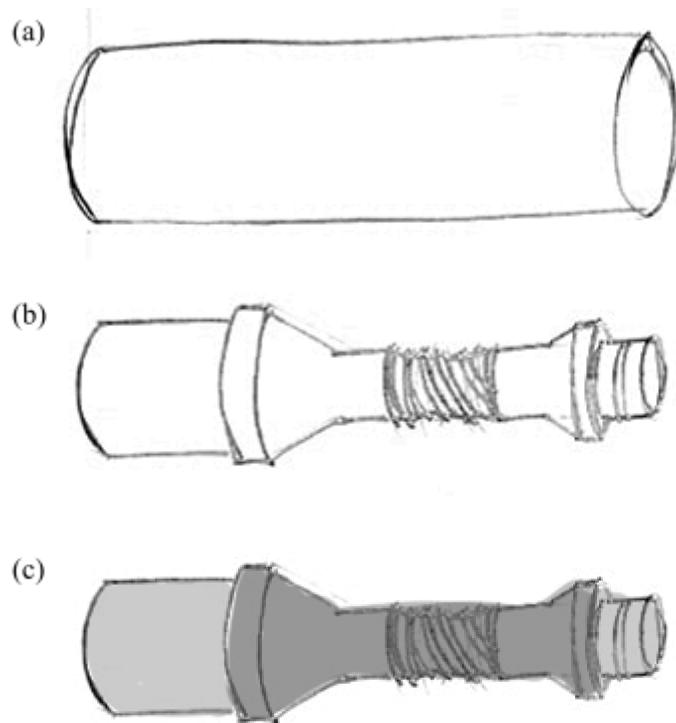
Manufacturing process of worm shaft; (a) forging near-net-shape, (b) turning and hobbing, and (c) case hardening
